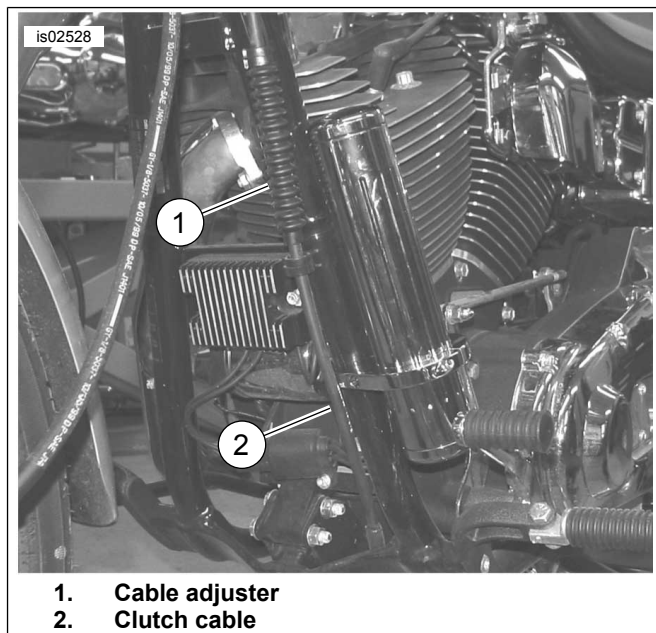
Mounting Location (Left Side of FXDWG Shown)
